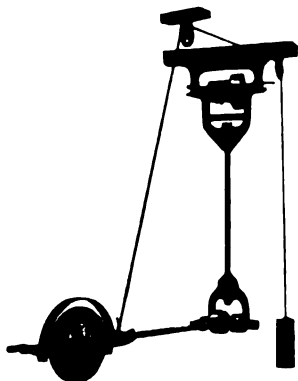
The Sterling Grinding Wheel Co. Tiffin, Ohio
